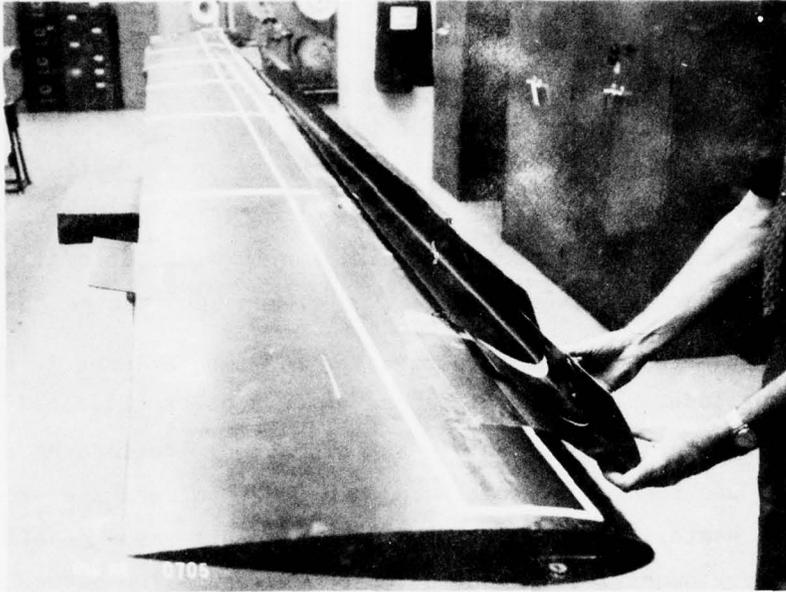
Blade S/N A2-25934 with Erosion Shield Removed
